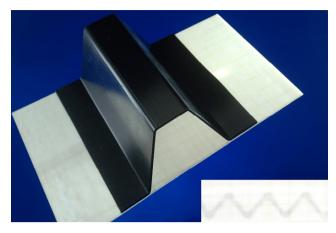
Structural assembly of GF plates with sinusoidal weld seam geometry
